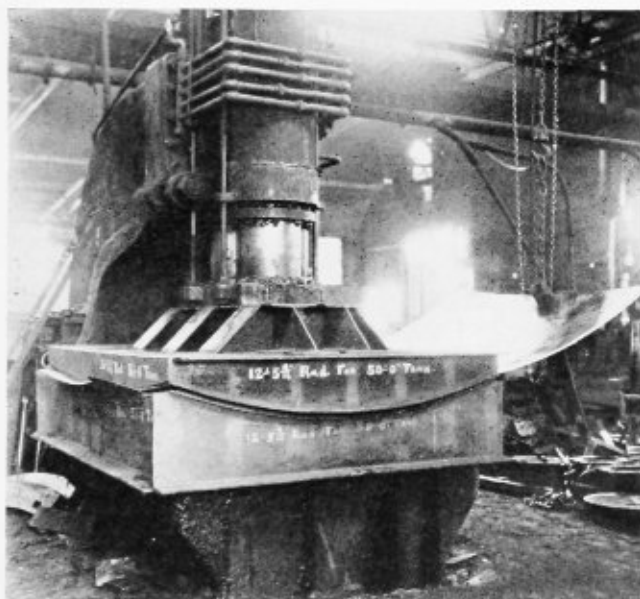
Crimping the edge of a $\frac{3}{4}$ -inch wrought iron plate, an operation carried out on the gag press
